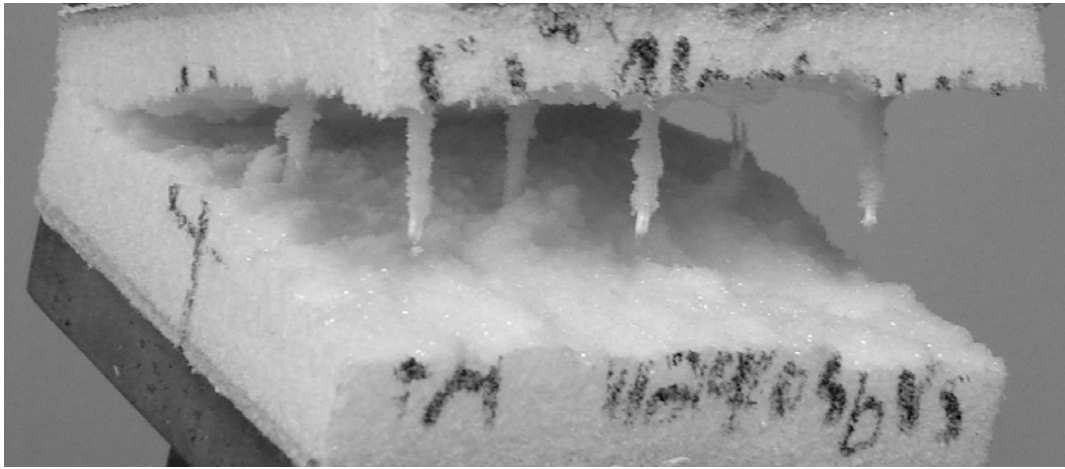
Fracture surface of a 0.16 stitch/cm² PET specimen.
